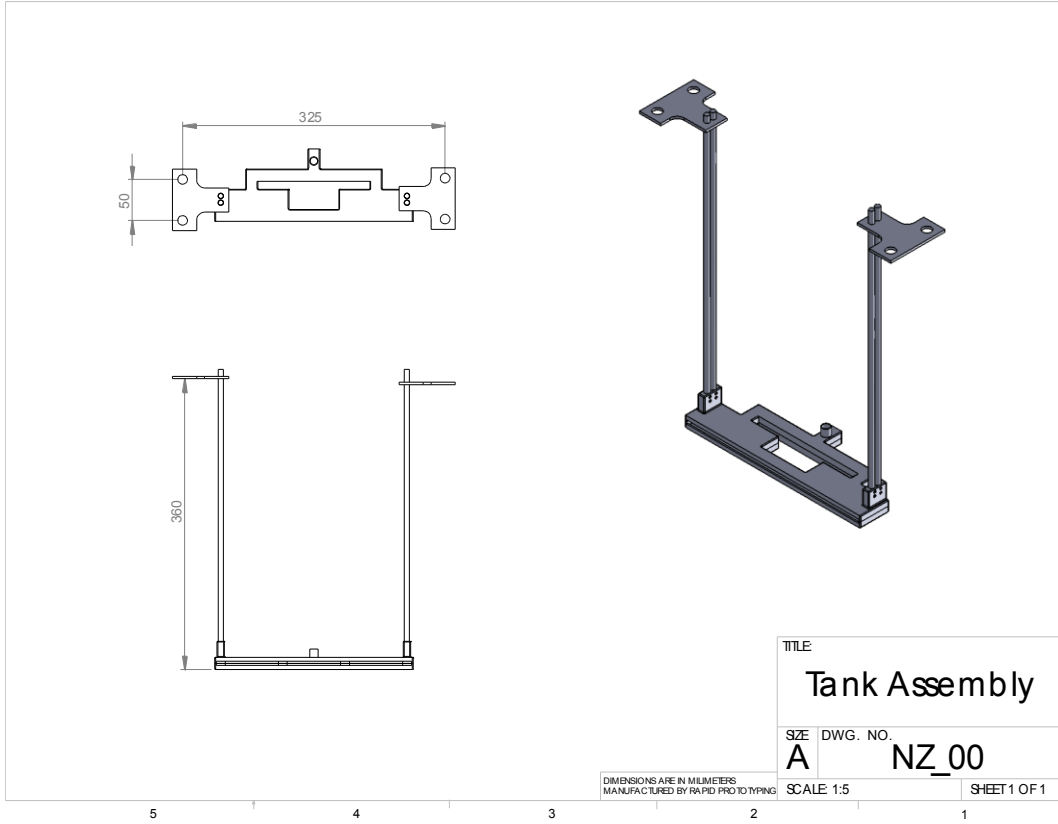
Isometric, top and front views of the nozzle assembled with the supports.
